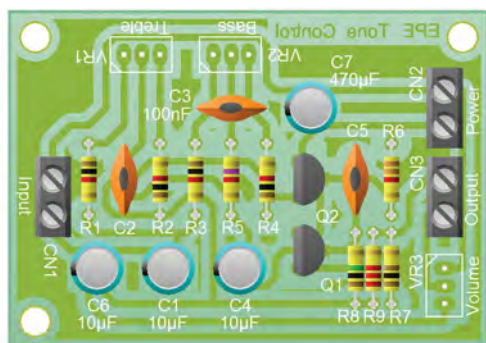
PCB component layout shown using Circuit Wizard's 'real world' view
